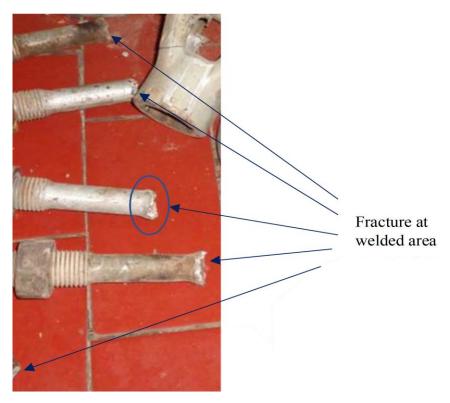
Most fractured bolts, indicating catastrophic failure occurred at the welded area in the bolt bar's middle.
